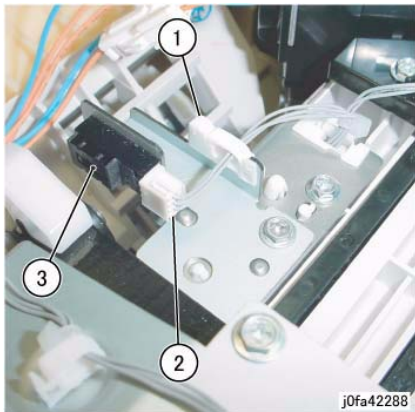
Removing the Eject Home Sensor (j0fa42288)
